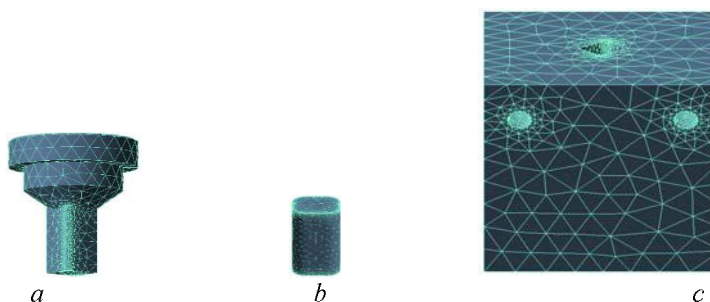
Grid drawing by the finite elements method: a – punch, b – workpiece for extruding, c – matrix
